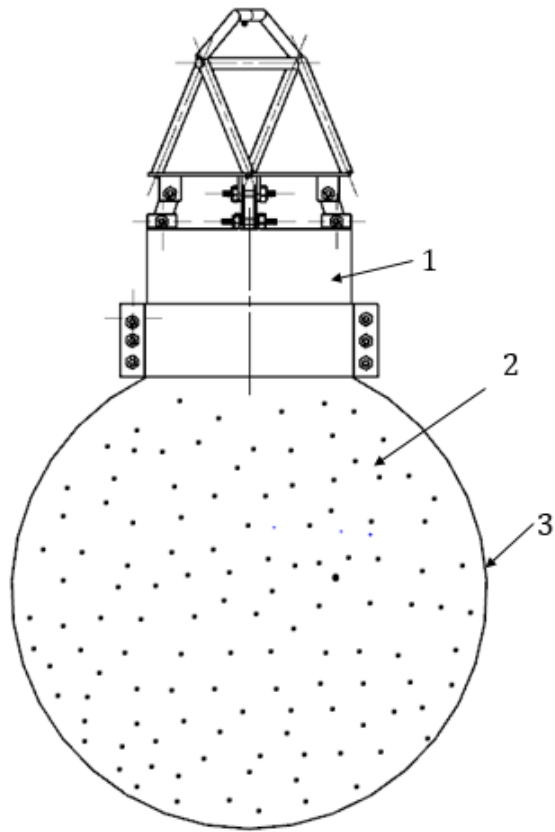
b): Final gripper assembly with vacuum pump mounted on top.
